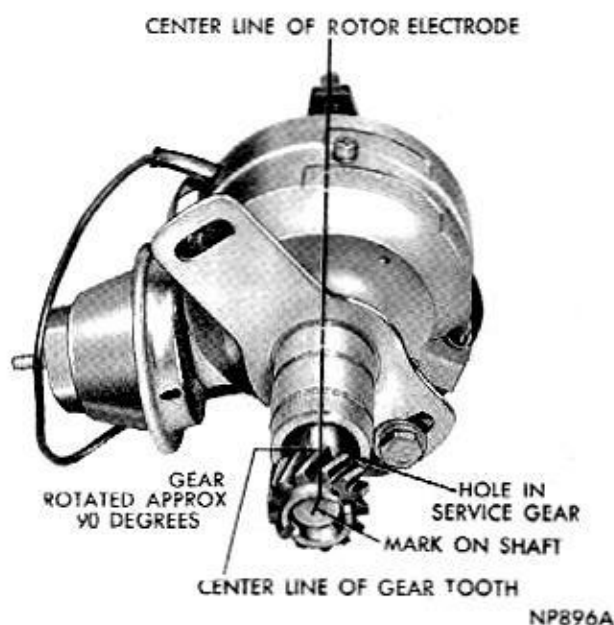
Aligning Gear Teeth with Centerline of Rotor Electrode
